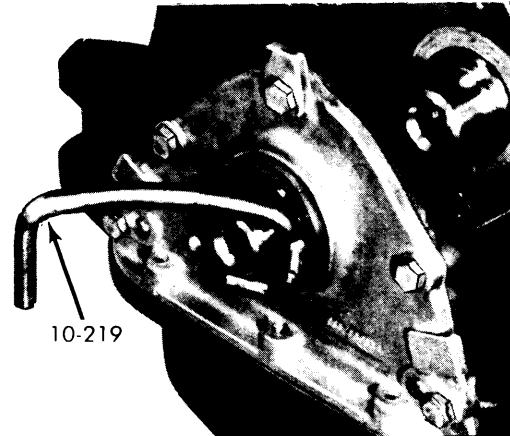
Using Special Tool 10-21 to Remove Front Main Oil Seal
